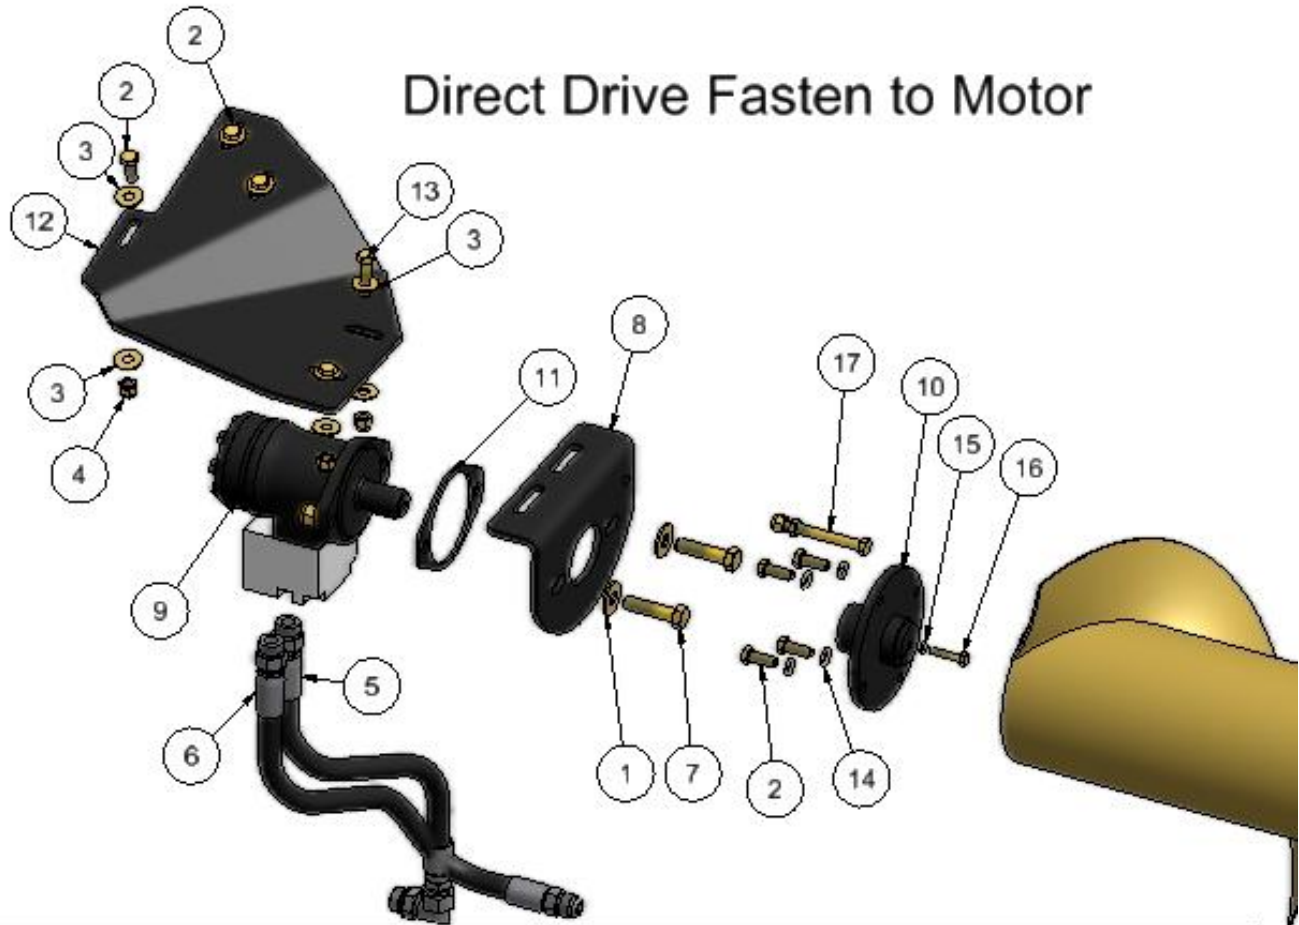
COMPLETE HEADER 974 RIGHT HAND DRIVE
